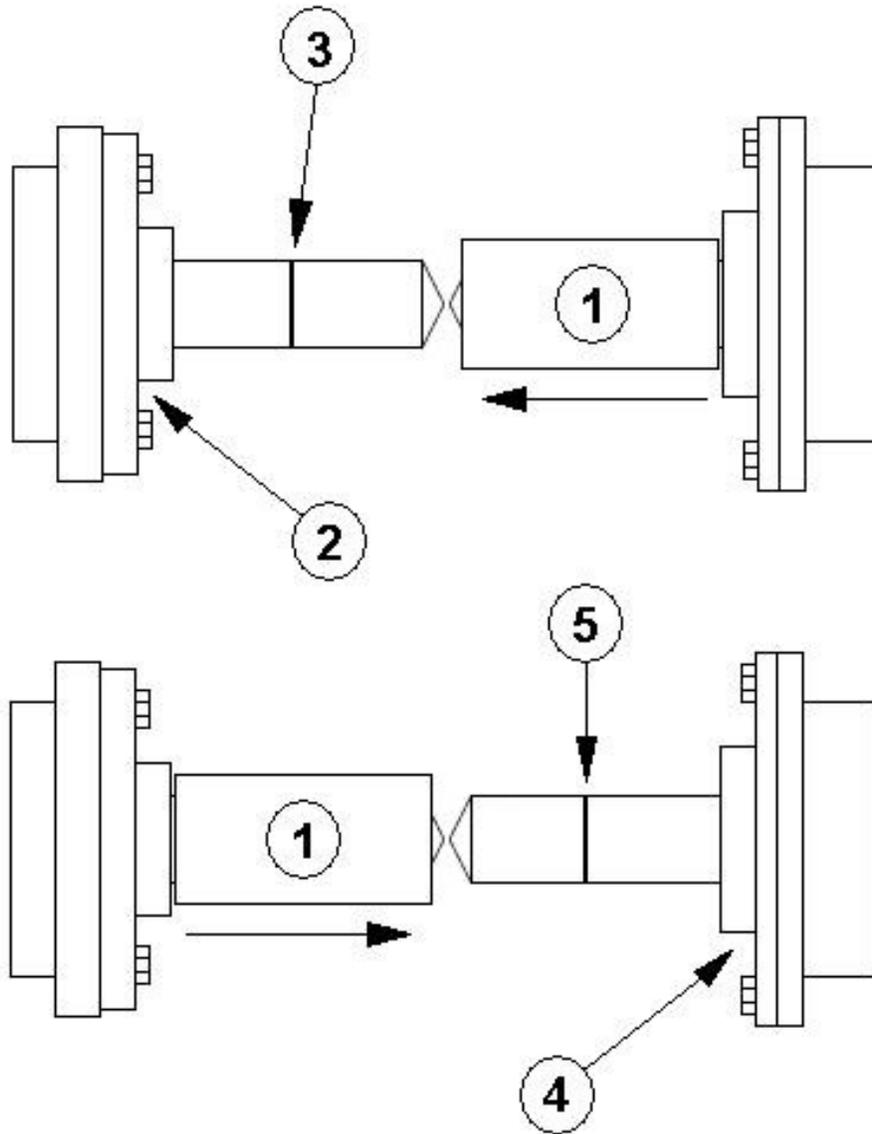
MDE - JET DRIVE ALIGNMENT TOOL
